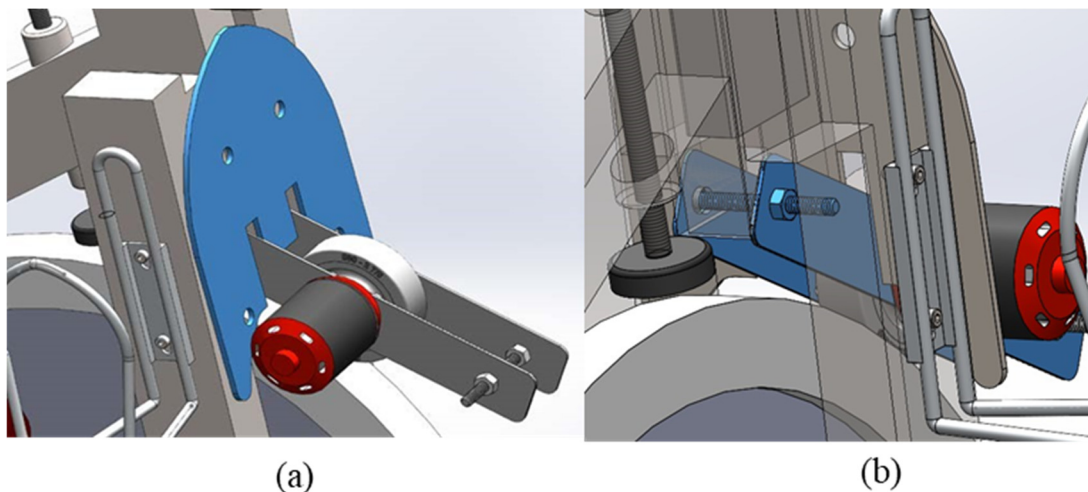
(a) The motor mounting and assembly as envisioned; (b) the bike frame modification needed to mount the motor.
